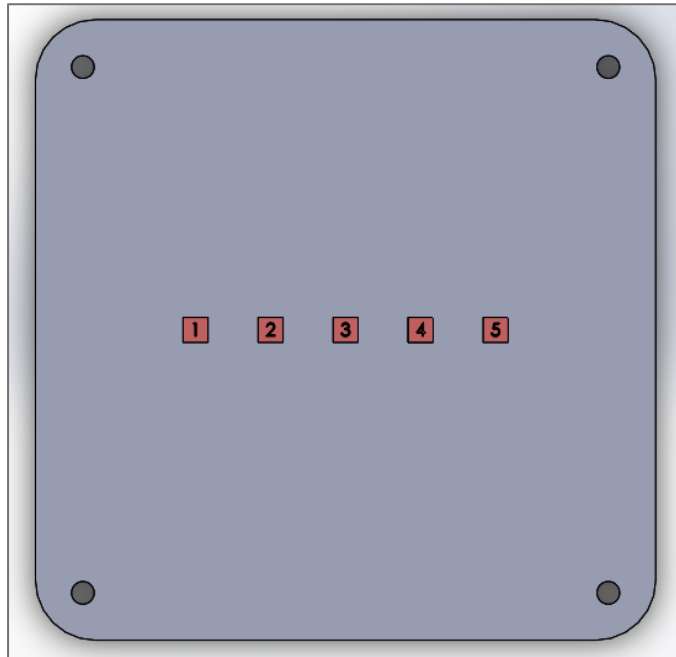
Build Job Layout on Renishaw AM 400 LBM steel platform for first build job with cubes numbered from 1-5
